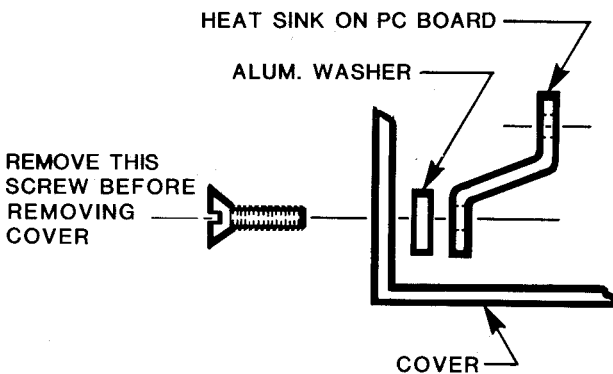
HEAT SINK HOLD DOWN SCREW
